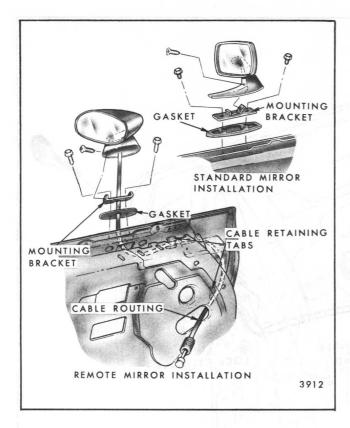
Door Outside Remote Mirror Removal - "F, H and X" Styles - Left Side Only
